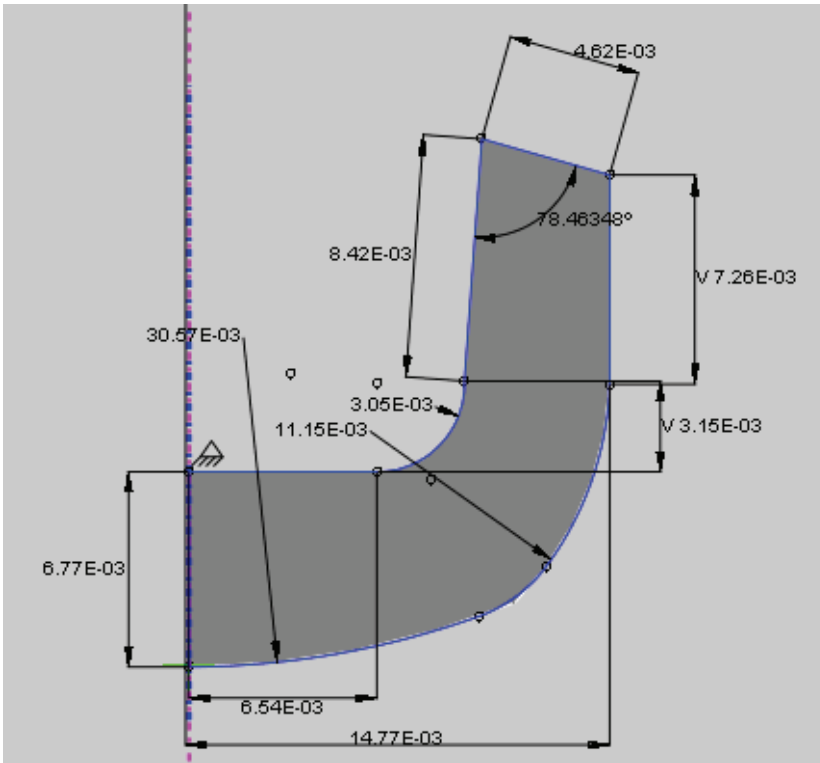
Principal nodes and dimensions of the initial cup workpiece.
